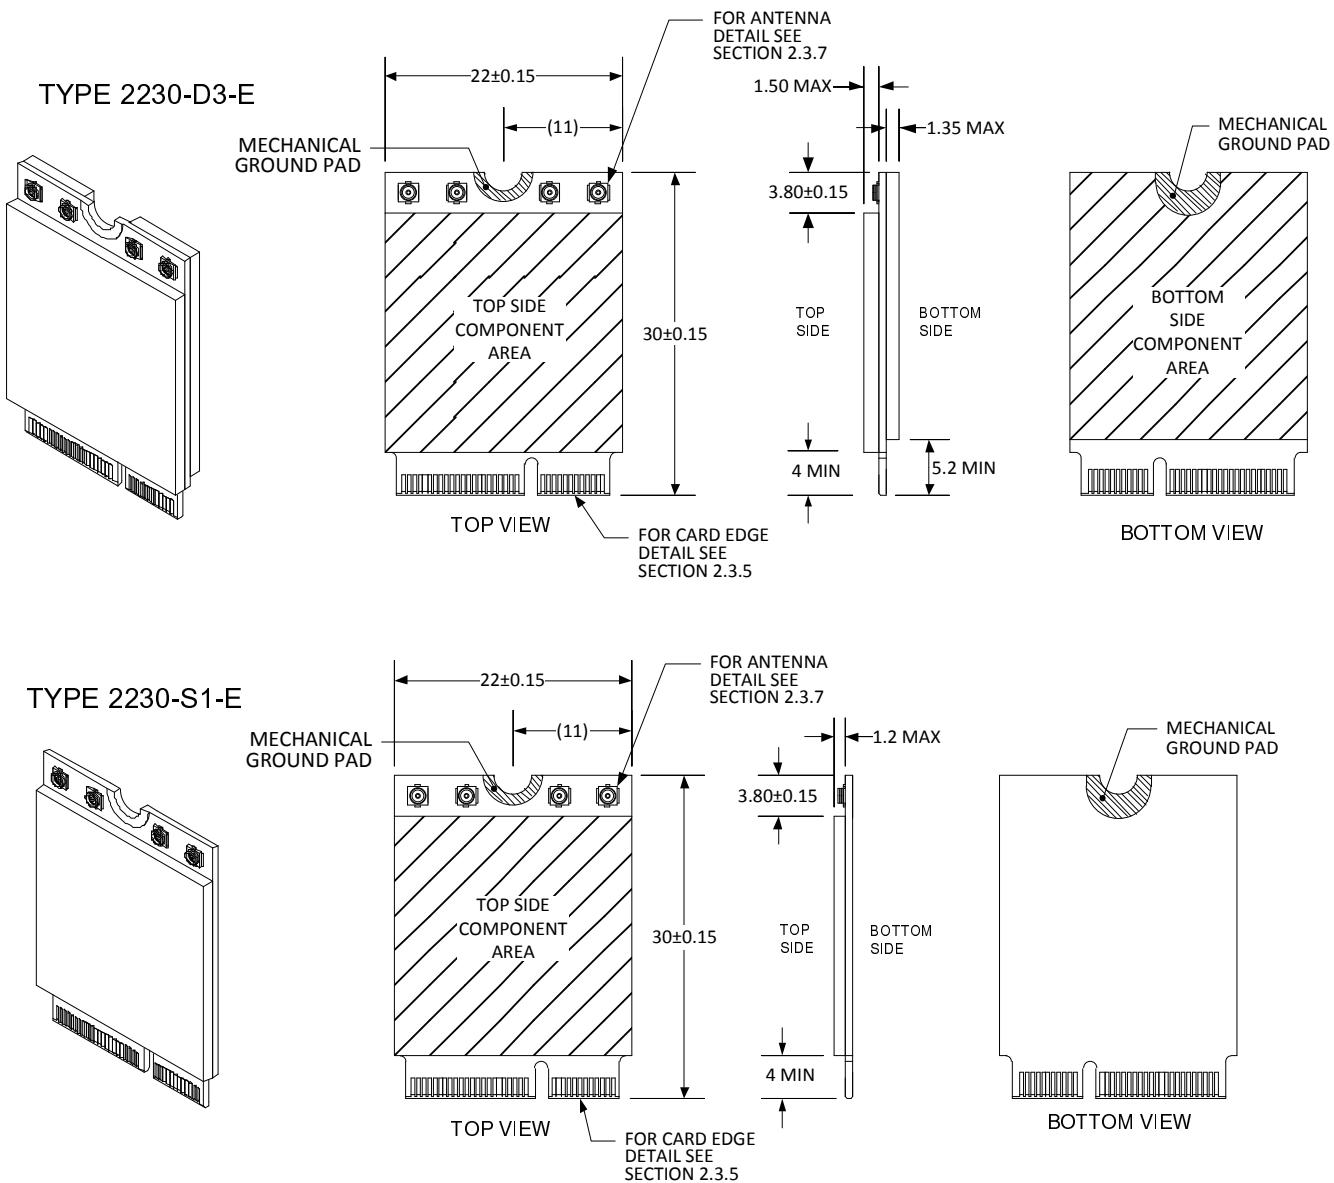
M2 Type 2230-D3/S1 Mechanical Outline Drawing Examples
